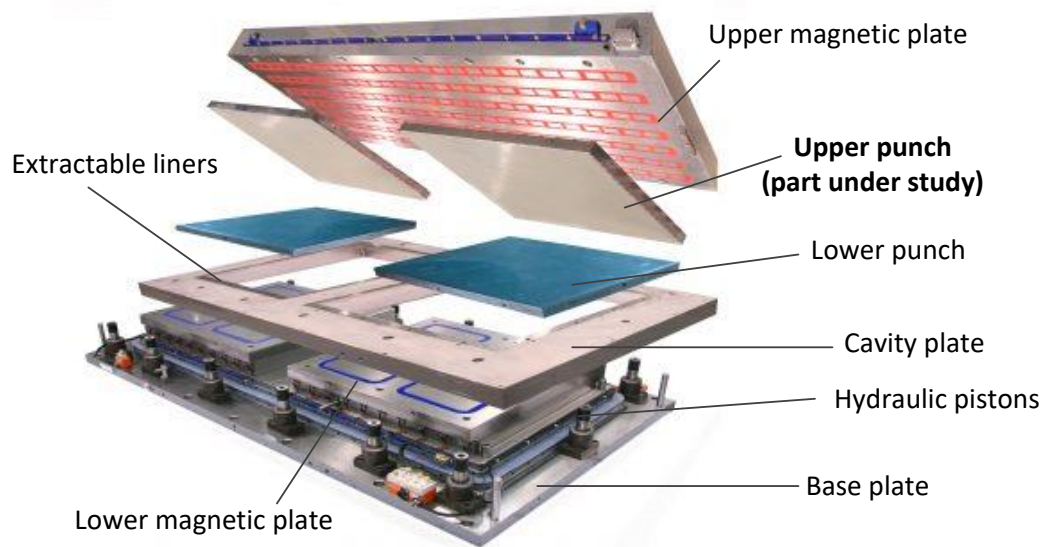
a) Typical mold for manufacturing tiles. Courtesy of MACER S.L.
